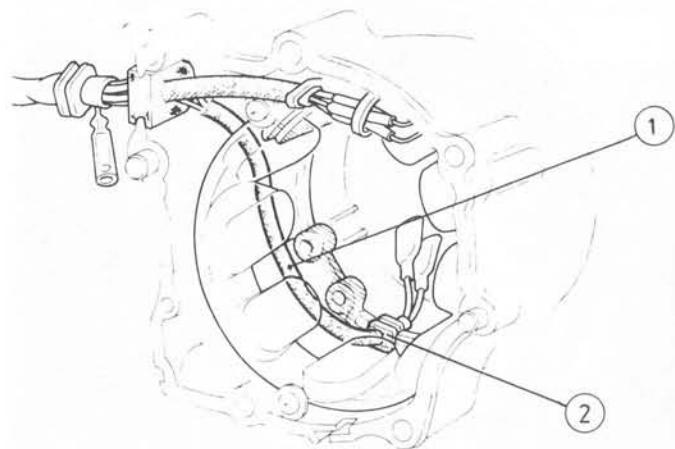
Routing the contact breaker lead – CB125 T, T2, TA and TB
